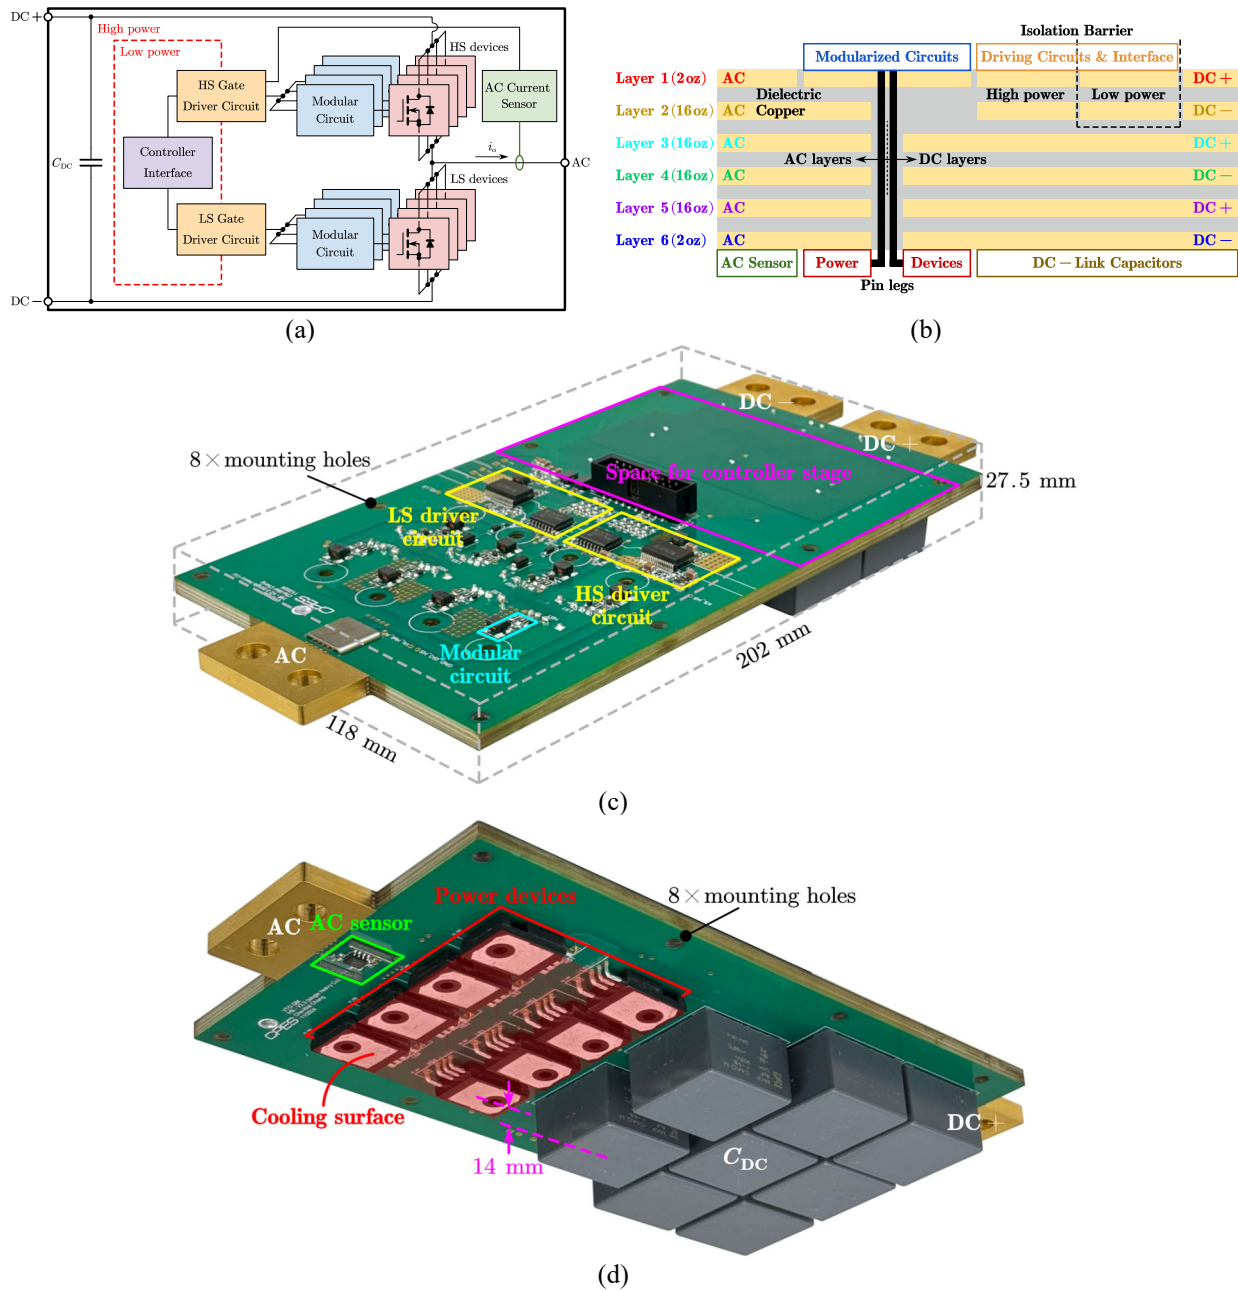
Designed all-in-one HB PCB, achieving a power density of 101.7 kW/L by following the proposed single-board integration strategy (a) PCB circuit diagram, (b) internal layer structure, (c) top view of the HB PCB, and (d) bottom view of the HB PCB.
